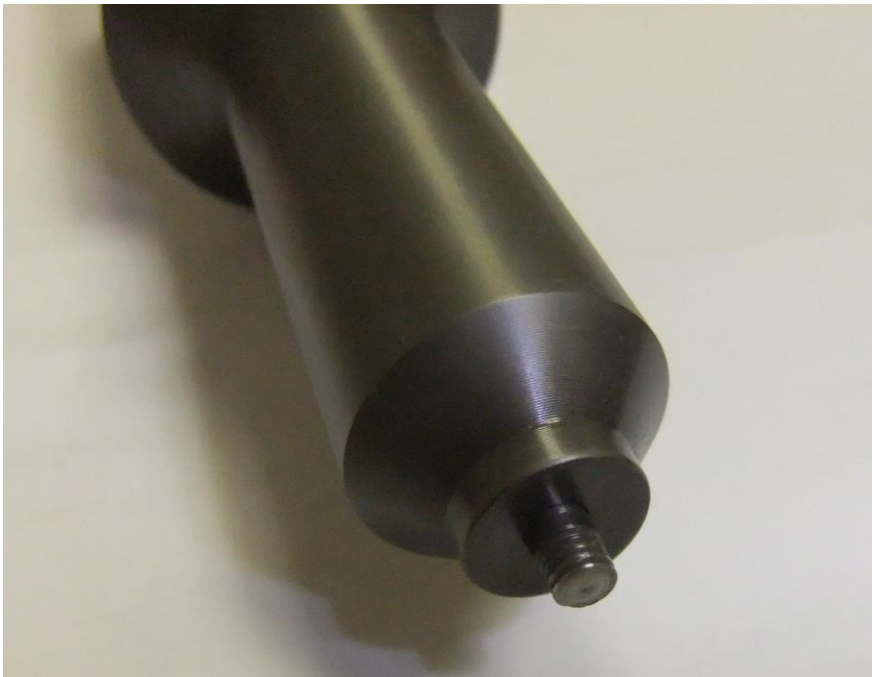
Assembled tool shoulder and pin heat treated to give a hardness of Rockwell C 54.
